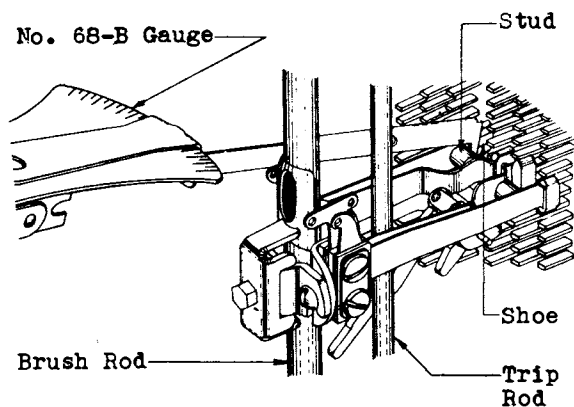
Method of Checking Brush Spring Tension Using No. 68-B Gauge
